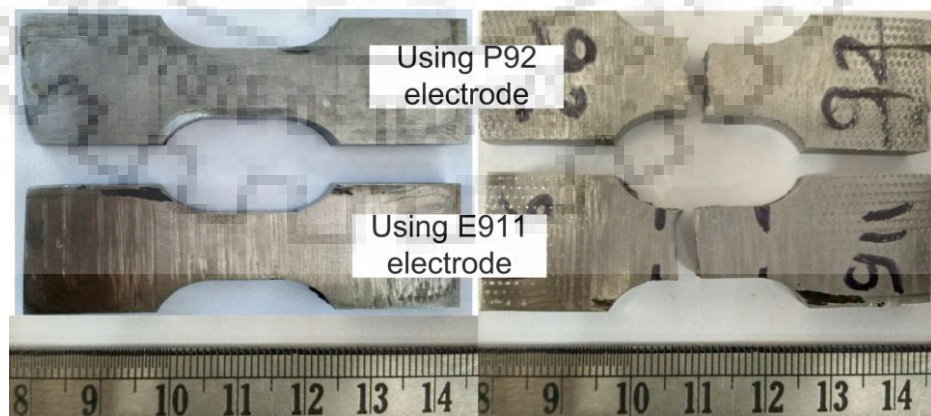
Specimens before and after the longitudinal tensile test in as-welded condition
